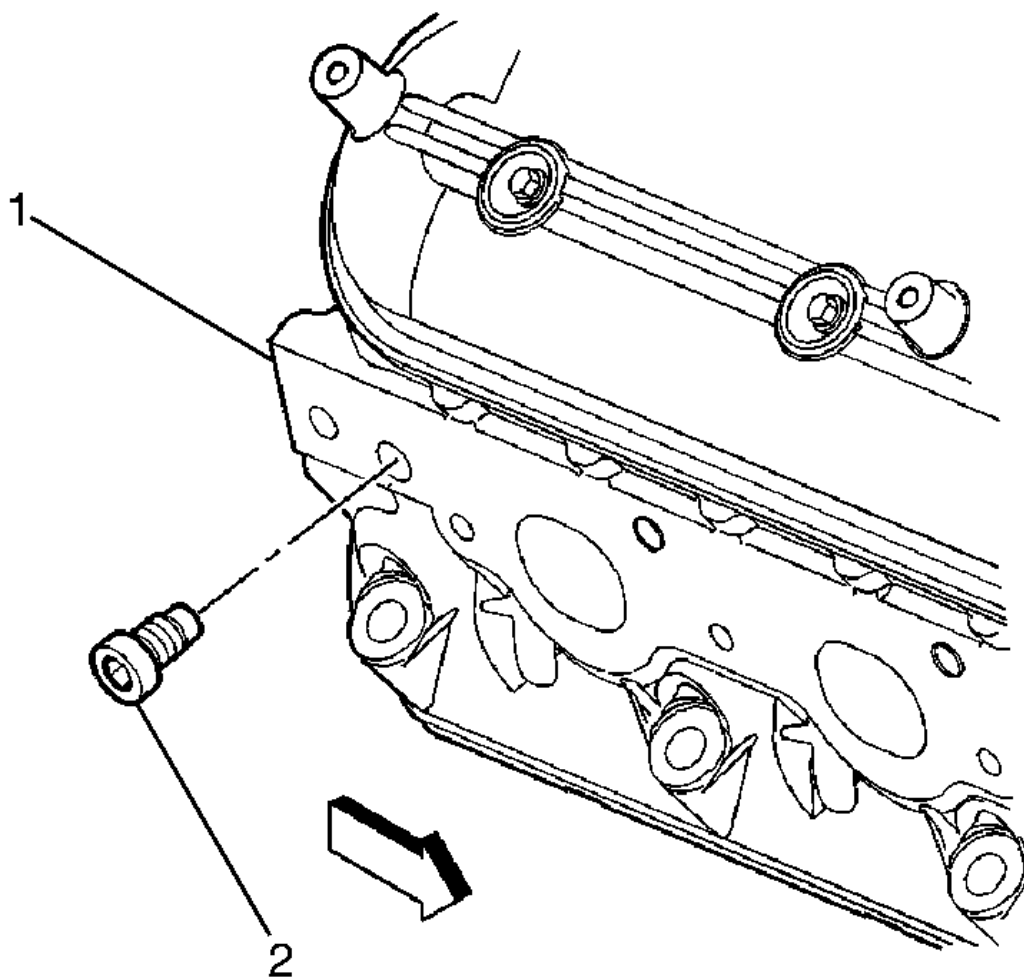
Identifying Coolant Plug & Right Cylinder Head
